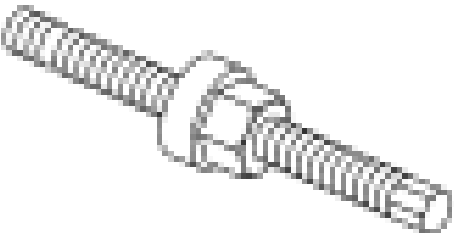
Installing Crankshaft Pulley Washer & Bolt Using Special Tools (303-D055)
